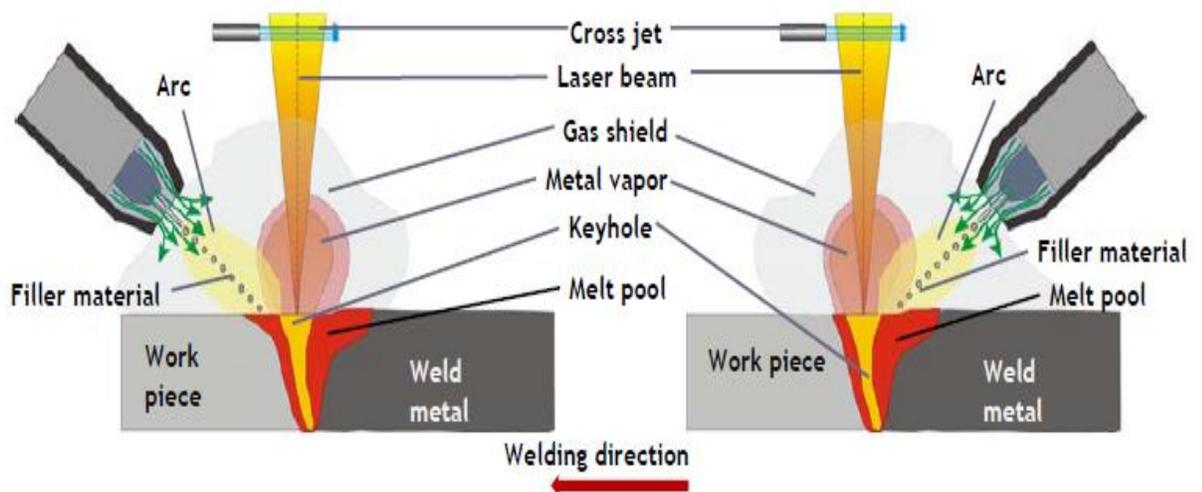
Schematic illustration of hybrid welding with leading arc (left) and leading laser (right) arrangement [107]
